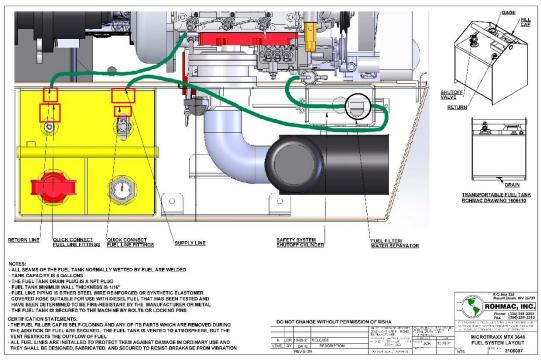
Machine Approval Application Draft Fuel System Drawing
